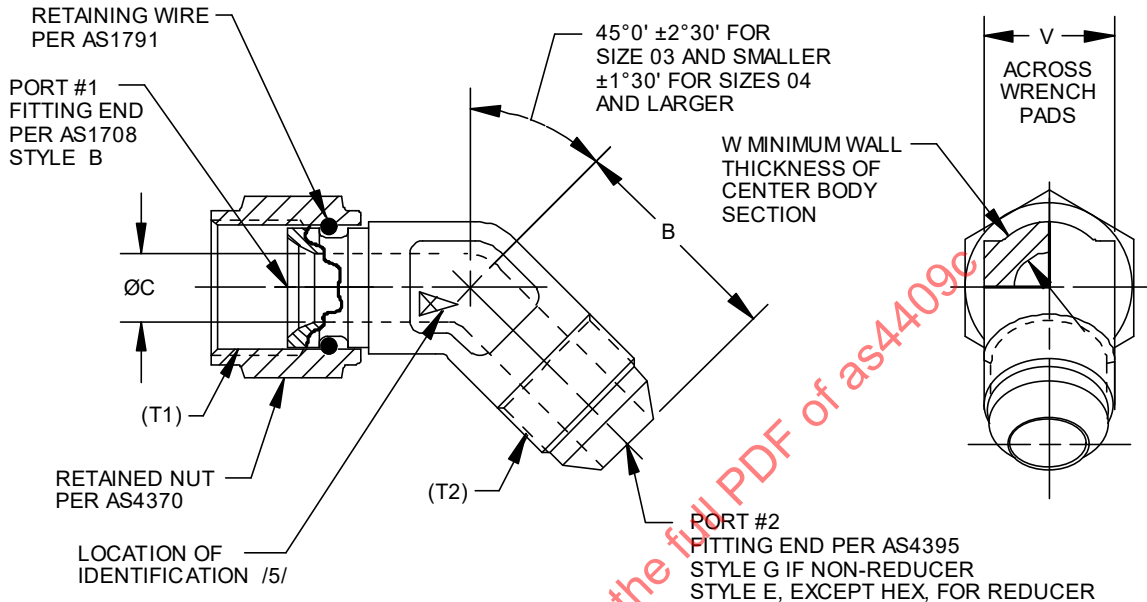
FITTING ASSEMBLY, ELBOW 45°
